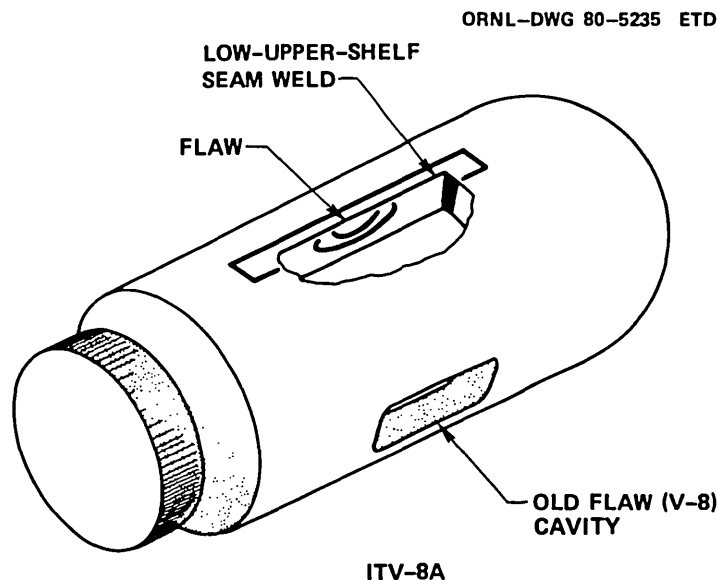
Schematic of vessel V-8A showing location of flaw relative to special seam weld.
